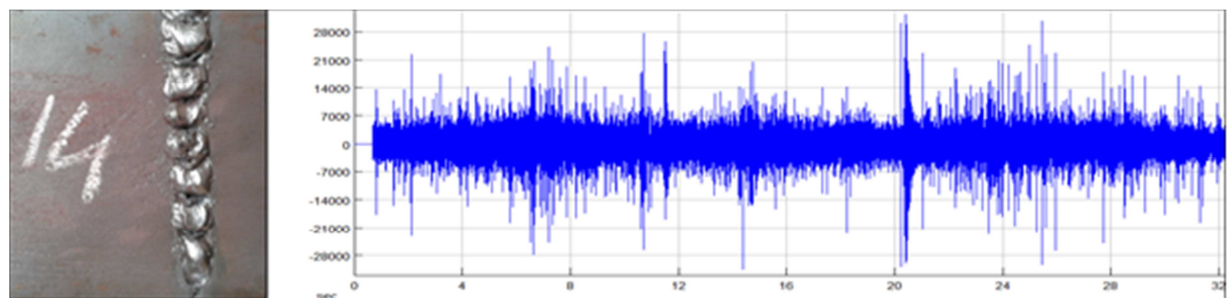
Good Weld: (a) Specimen Photograph (b) Sound signal for Good Weld
